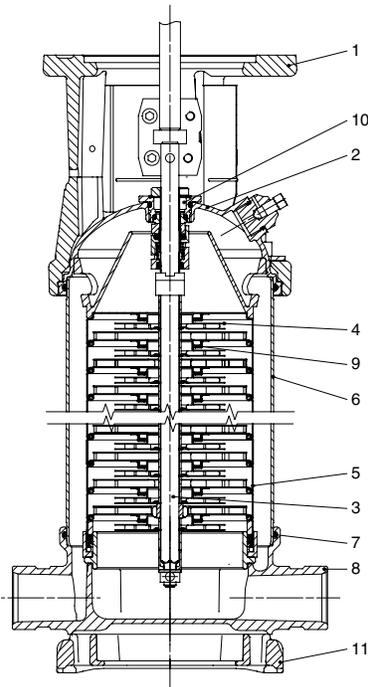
Sectional drawing of CRNE 1 and 3-HS
